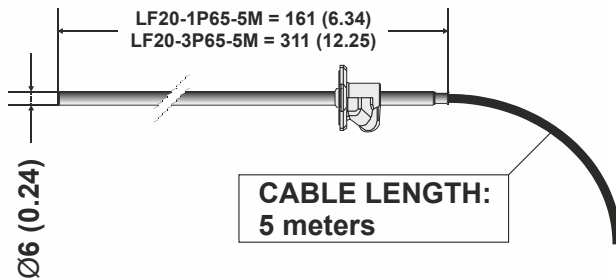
Dimensions of the LF20-xP65-5M duct sensor in mm (inches)
